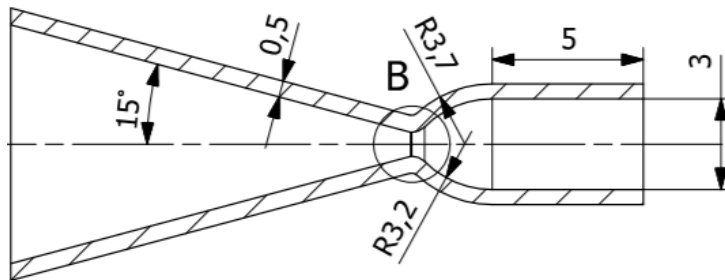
Cold Gas Nozzle Dimensions for Vacuum Conditions
